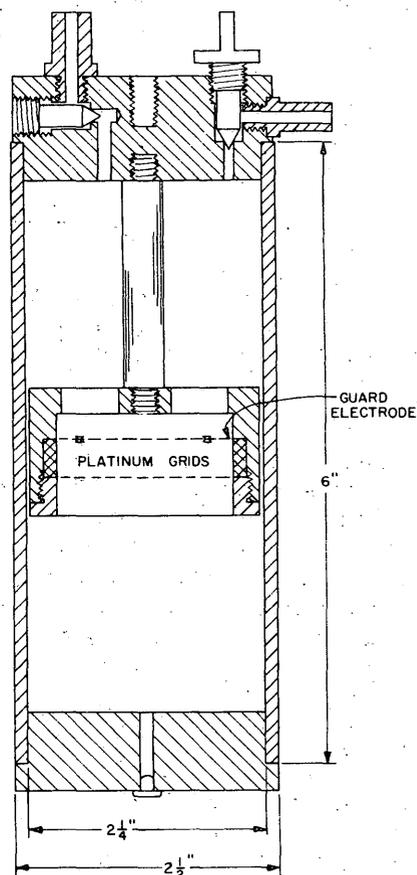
Apparatus for growing a sample in a sealed guarded ring measuring assembly.
